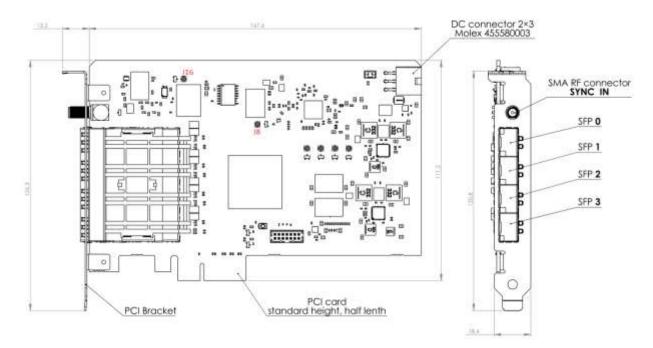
PCB top side and front panel views for type A and type B boards (dimensions in millimeters)
